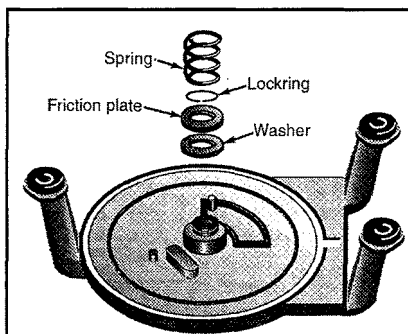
The friction plates (lower not pictured) and spring washer are secured using the pulley lockring
